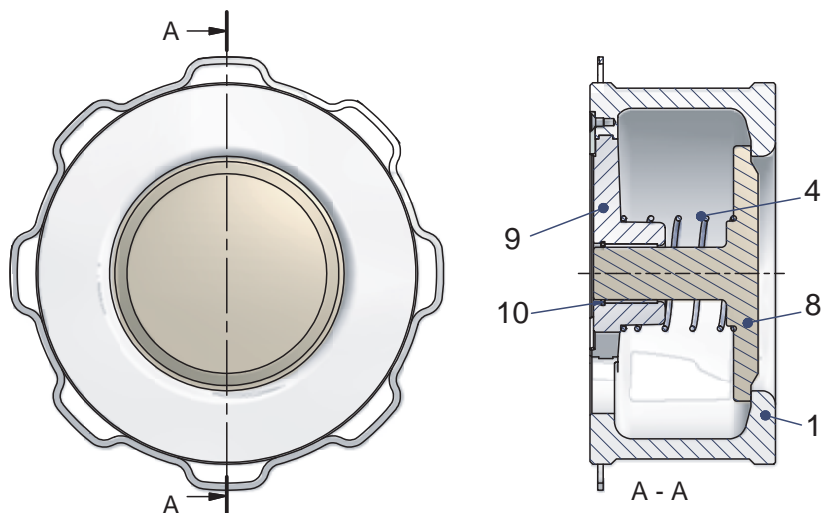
CHECKO<sup>®</sup>-D - Disc check valve
